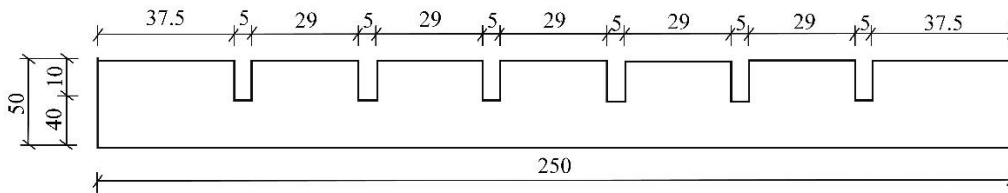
Inner grooved anchor fastener elevation diagram (Unit: mm)
